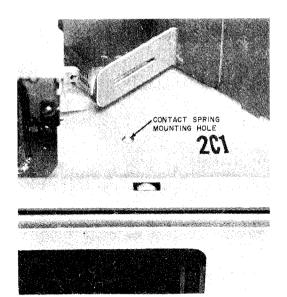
♦Location of Contact Spring Mounting Hole in 2A, 2C, or 2D Telephone Sets¶
